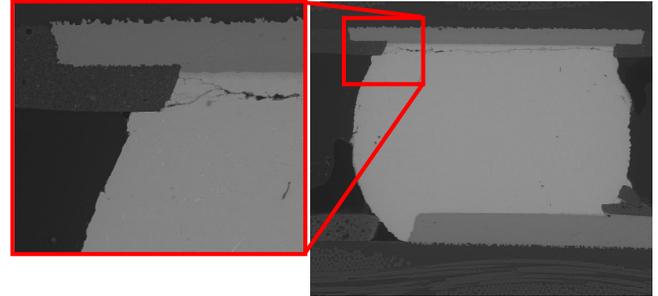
Cross-section of failed sample - ENEPIG - A (SAC305 Solder, 500 hrs Aged @ 100°C)
